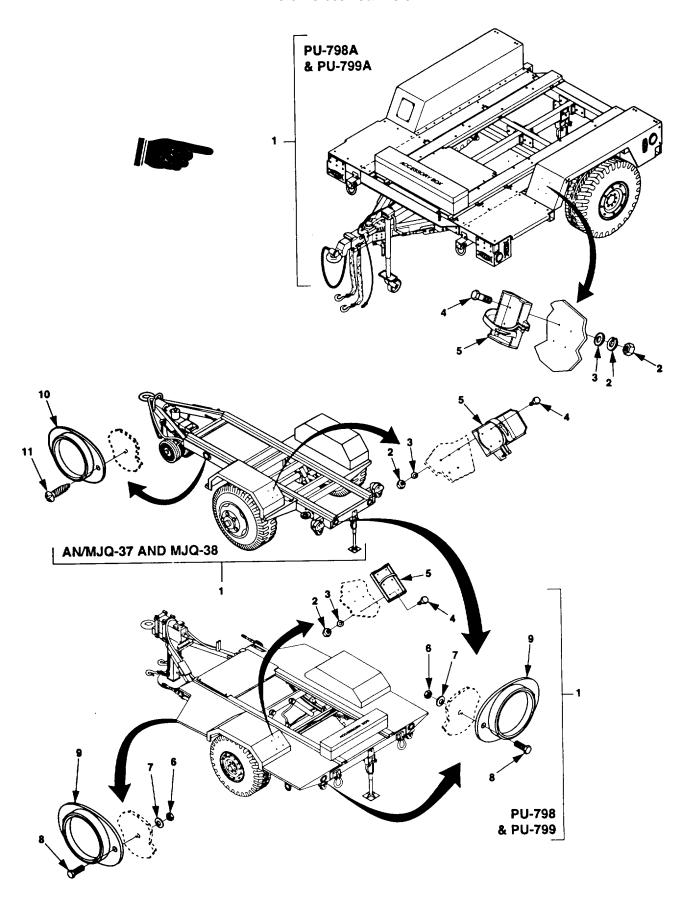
Power Plant/Power Unit Trailer Assembly (Sheet 1 of 2)
